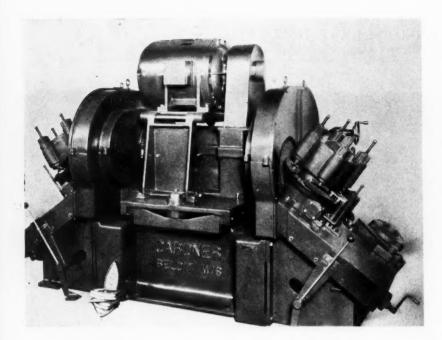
Grinder Especially Built for Grinding the Beveled Edges of Sad-iron Sole Plates on a High-production Basis
